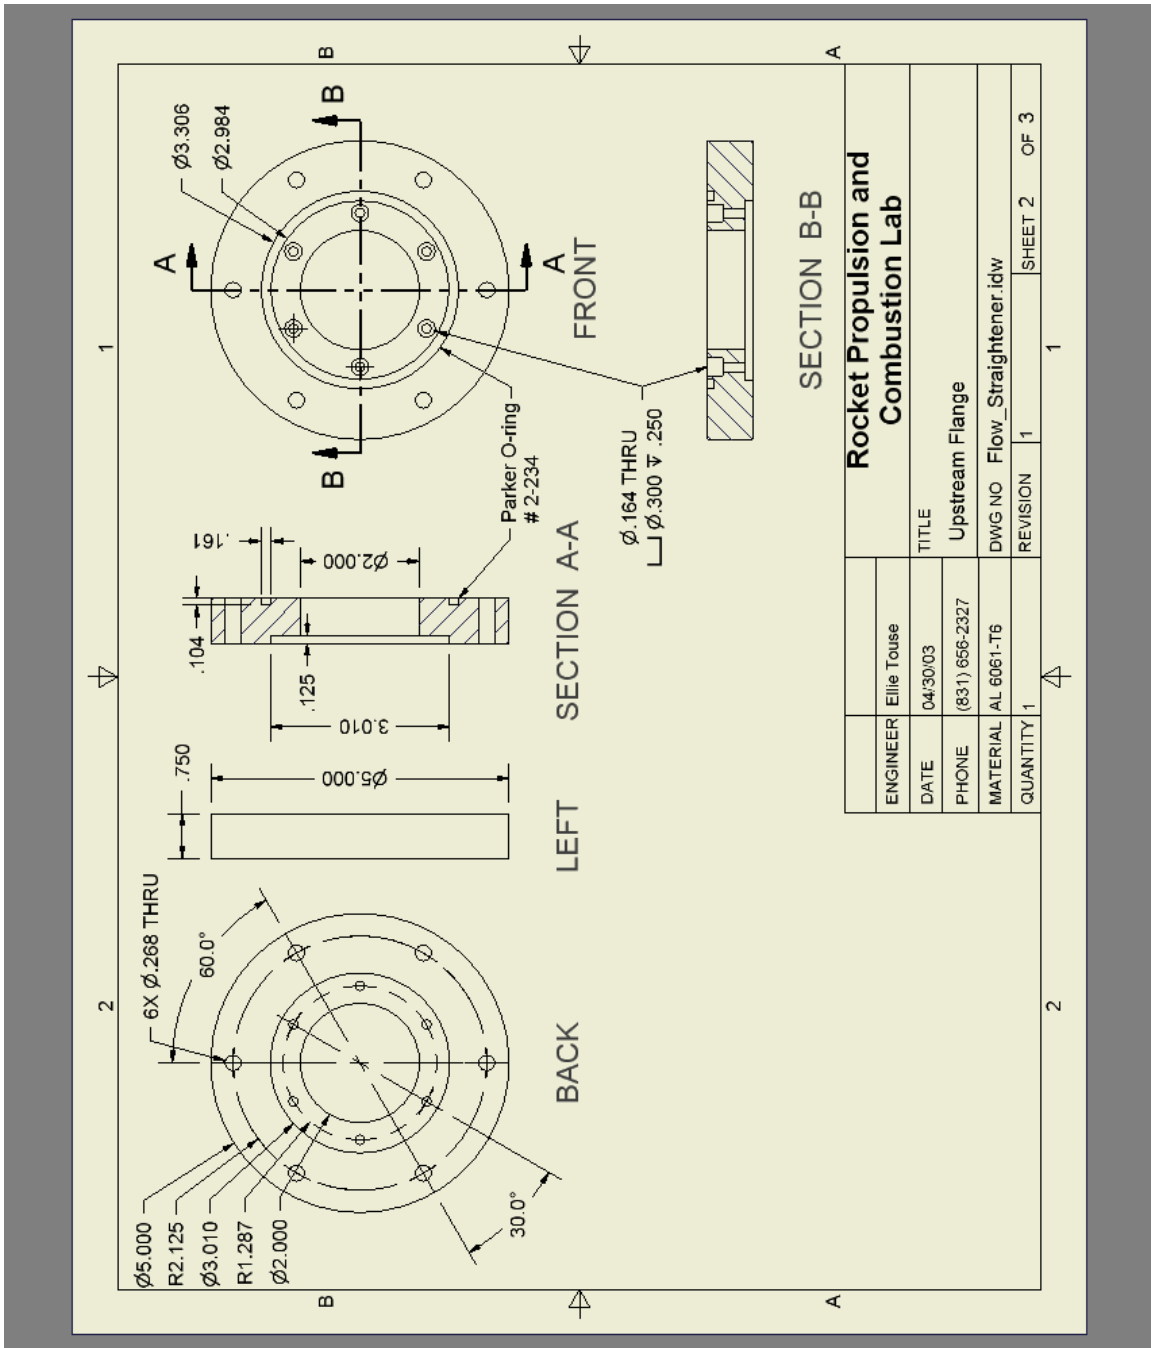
Flow Straightener Upstream Flange for Axisymmetric Test Section
